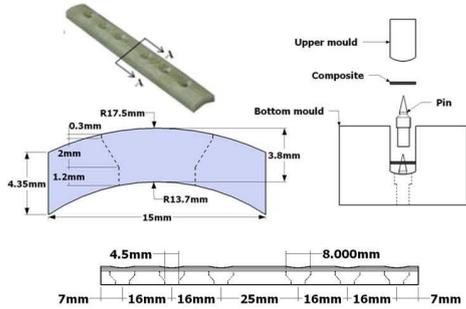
Shape of bone plate mould and dimensions of composite bone plate.
